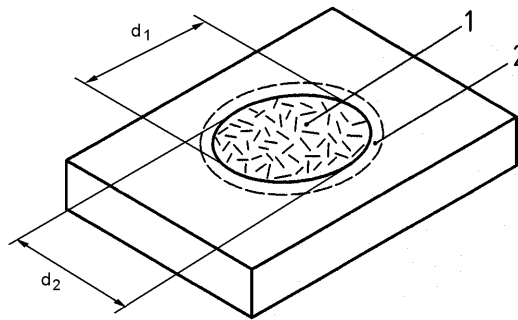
Spot diameter  $d_p$ ; fracture in joining plane
